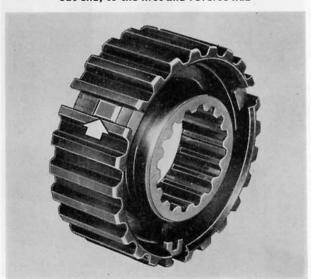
The sliding keys must be assembled so that the pips on the keys are offset towards the spigoted end of the hub
